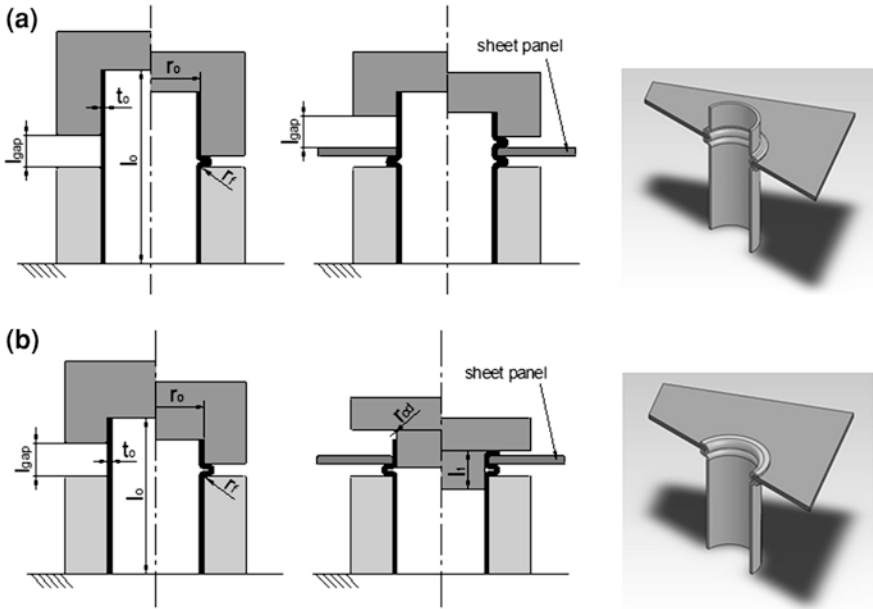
Joining tubes to sheet panels. a Two-stage axisymmetric compression beading and b axisymmetric compression beading followed by tube end flaring
